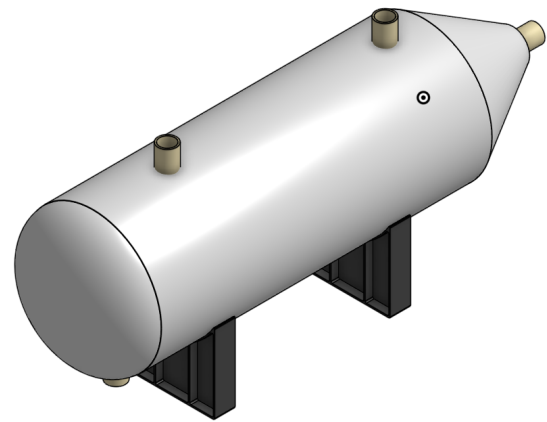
Isometric assembly view of the pressure vessel CAD model.
